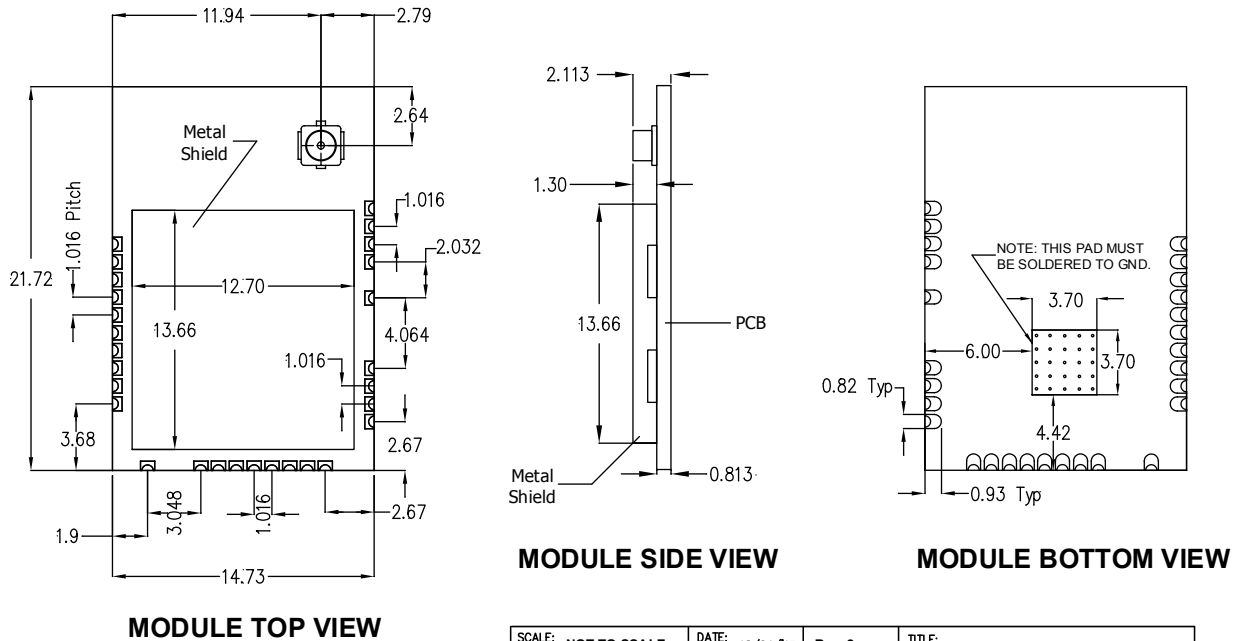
Module Drawings – ATWILC1000-MR110PB - Top, Bottom and Side Views
